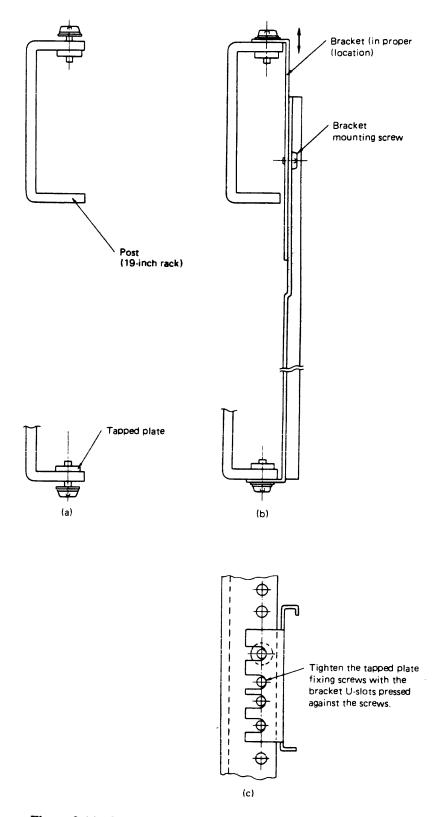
Bracket assembly mounting on the 19-inch rack
